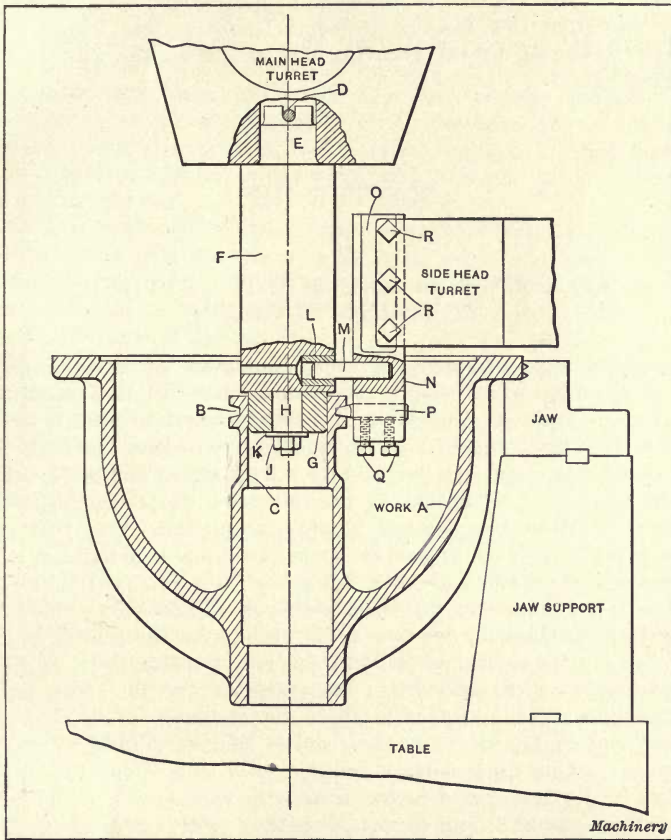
An Arrangement for cutting a Groove on the Outside of a Sleeve
